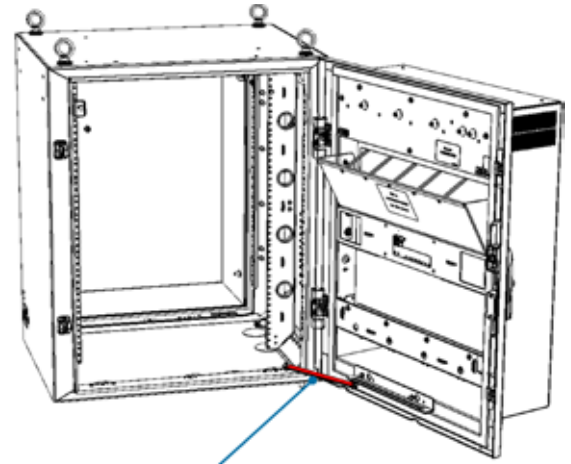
Opening Cabinet Door and Locking Hatch in Place
